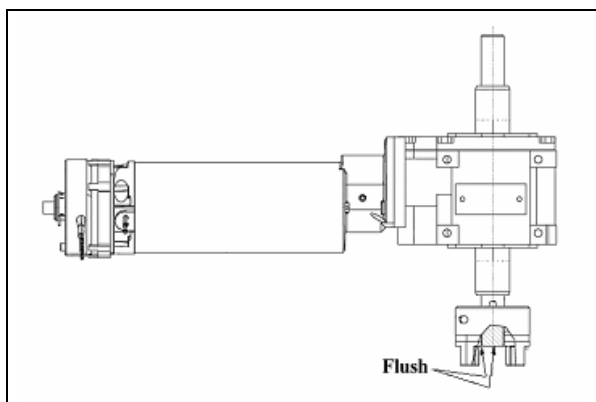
CLAMPING HUB POSITION ON GEARBOX SHAFT
